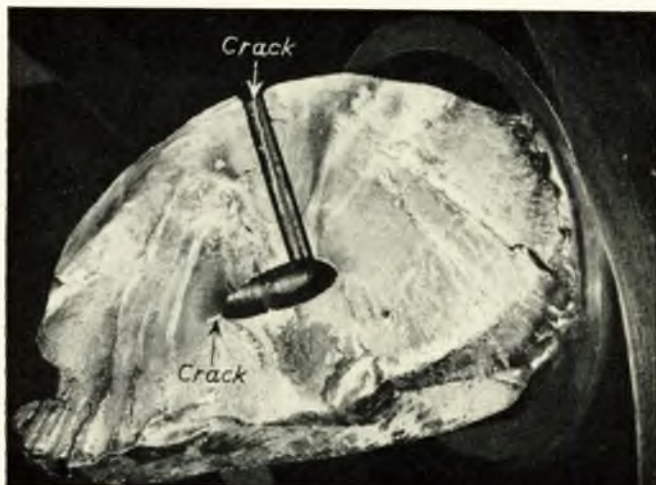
Torsional fatigue fracture through oil hole in No. 6 journal of five-throw auxiliary crankshaft (Case IX)
